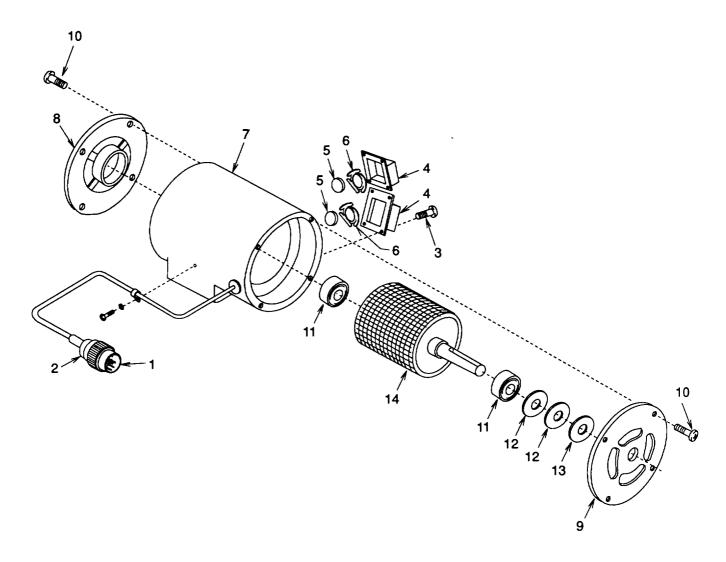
Motor Assembly, Welco Model M-4720-26A (3 phase)
